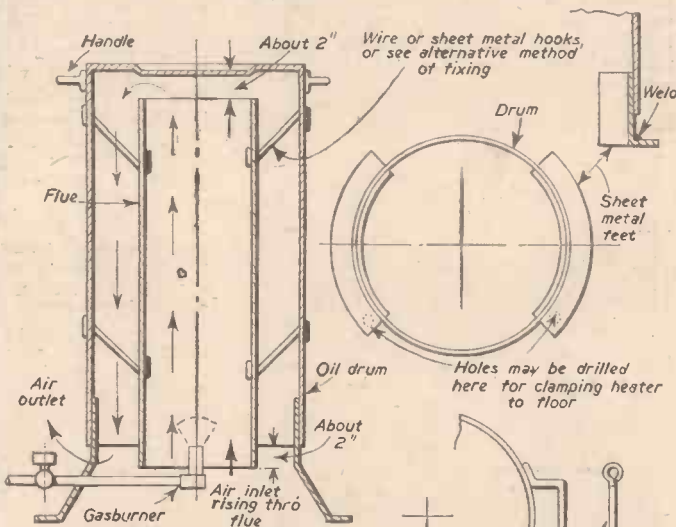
A cross-section of the heater, showing one method of fixing flue, and details of the handles and legs.
